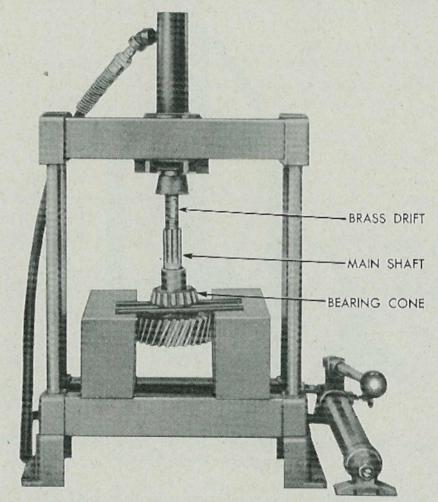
Pressing Bearing Cone and Sliding Gear off Input Shaft
